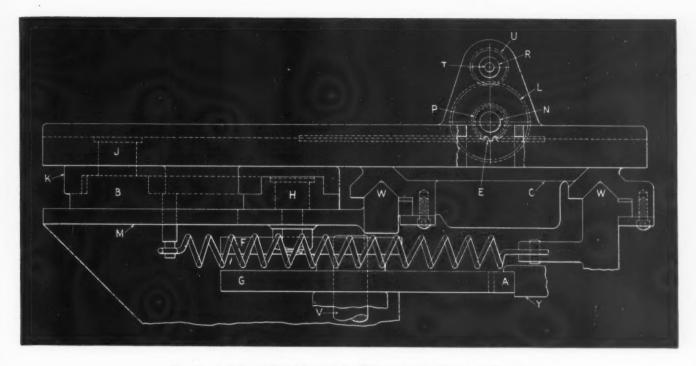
Left-hand End View of the Rifling Device Shown in Fig. 1
